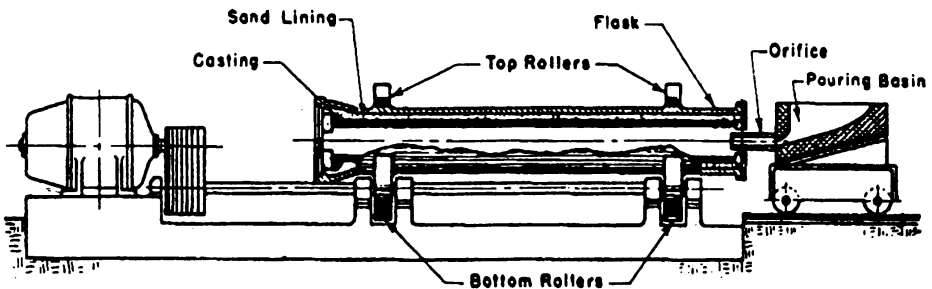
True Centrifugal Machine for Long-Tube Casting
